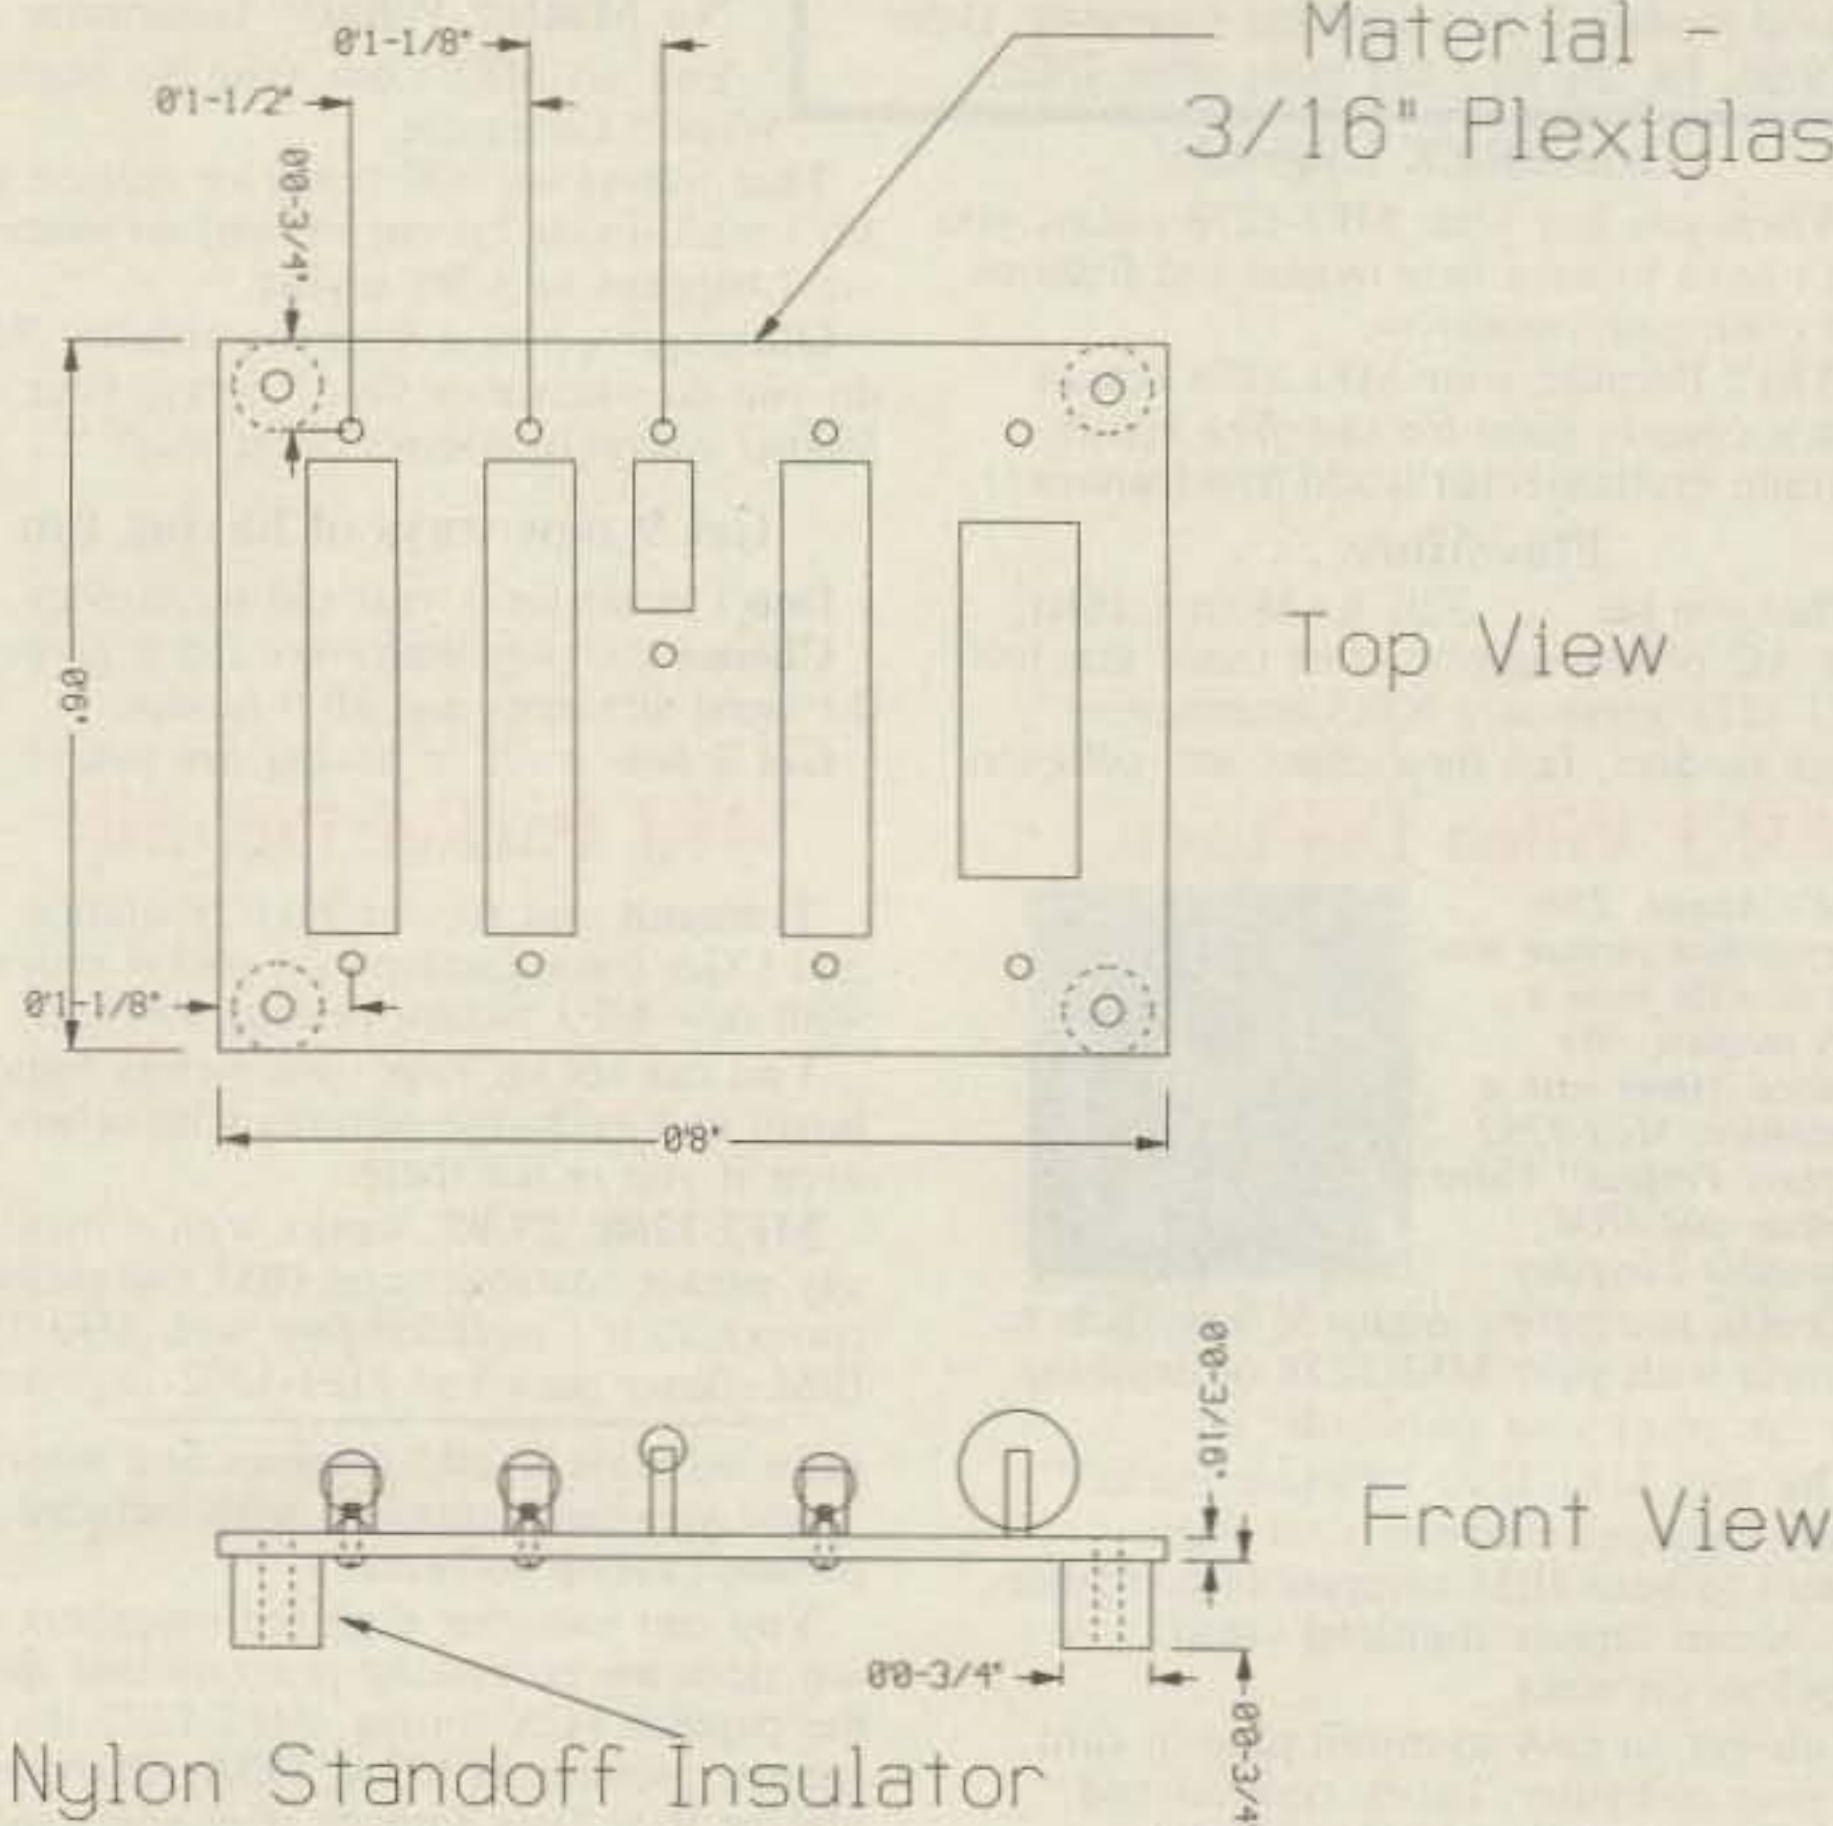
Mechanical diagram and parts placement for the soft-start circuit, a protective device.
